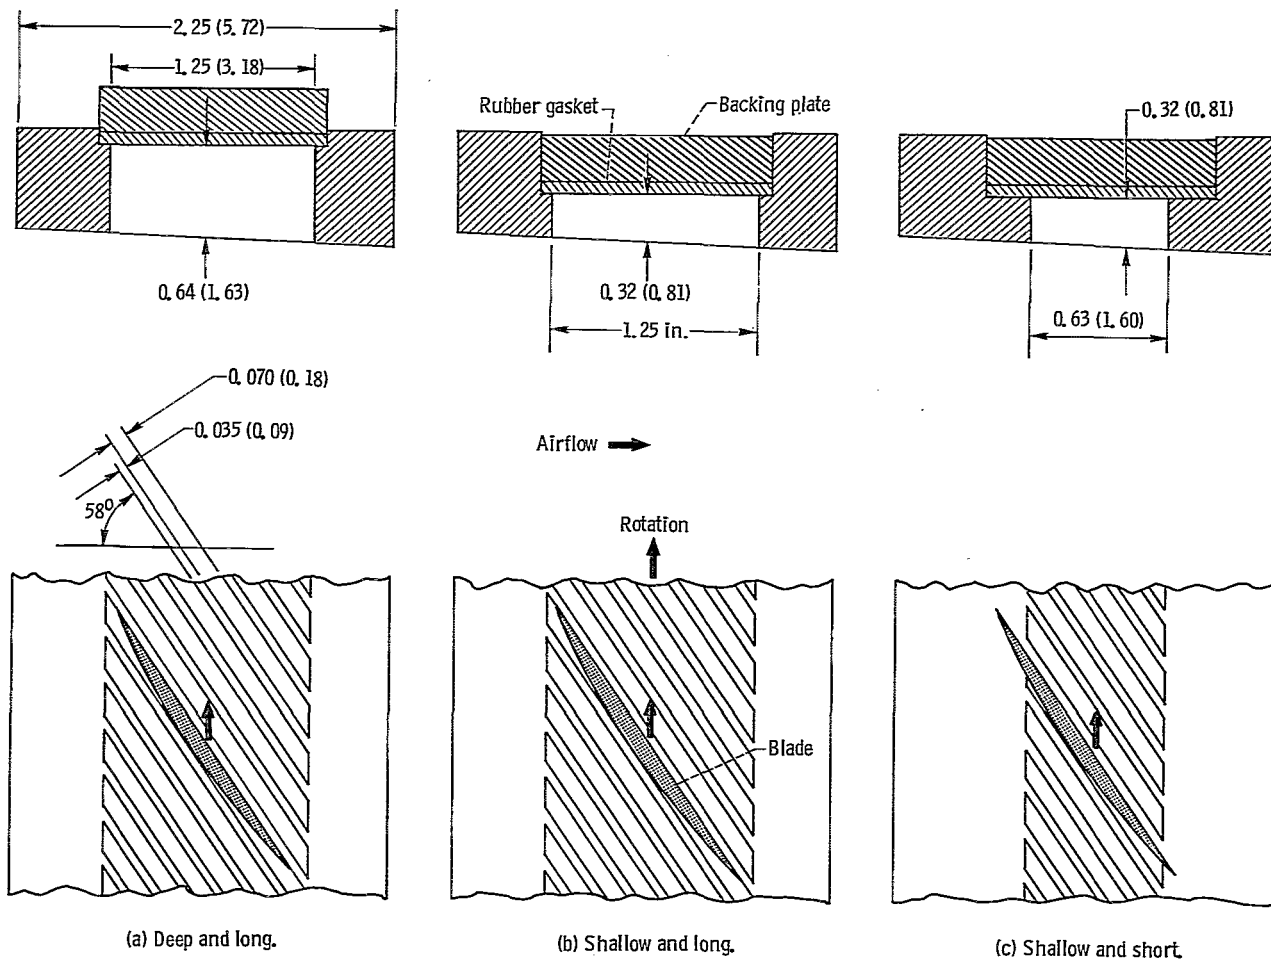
Blade angle slot inserts. (Dimensions are in inches (cm).)
